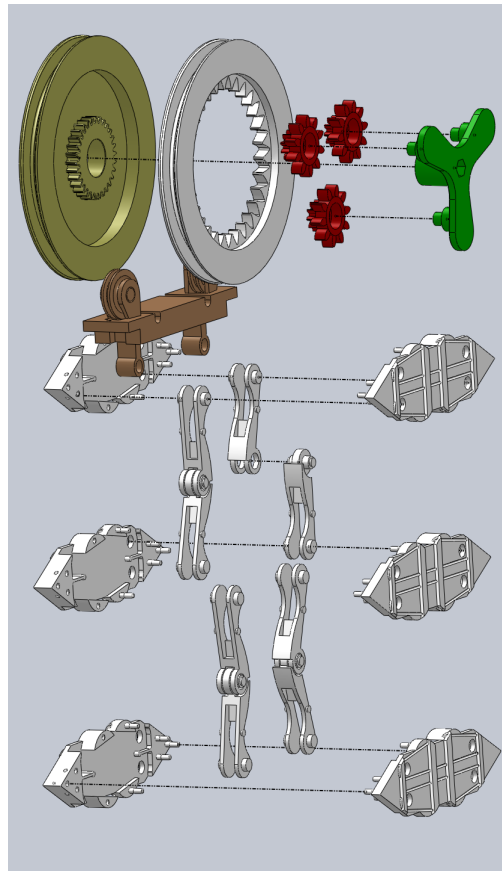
An exploded view showing the main mechanical components of our prototype. The parts are 3D-printed and assembled together.
